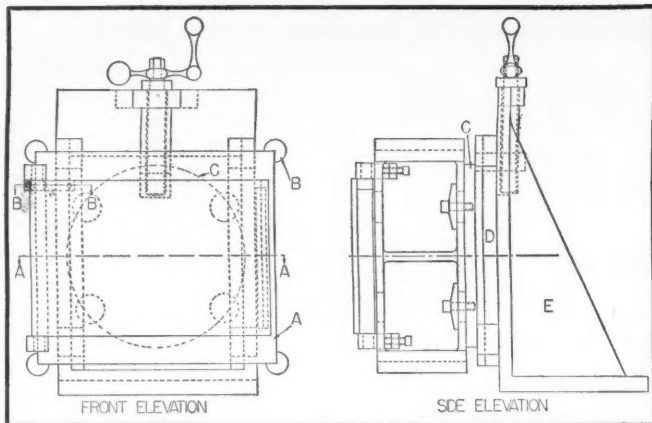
Drawing Showing Front and Side Elevations of Universal Sine Plate.
